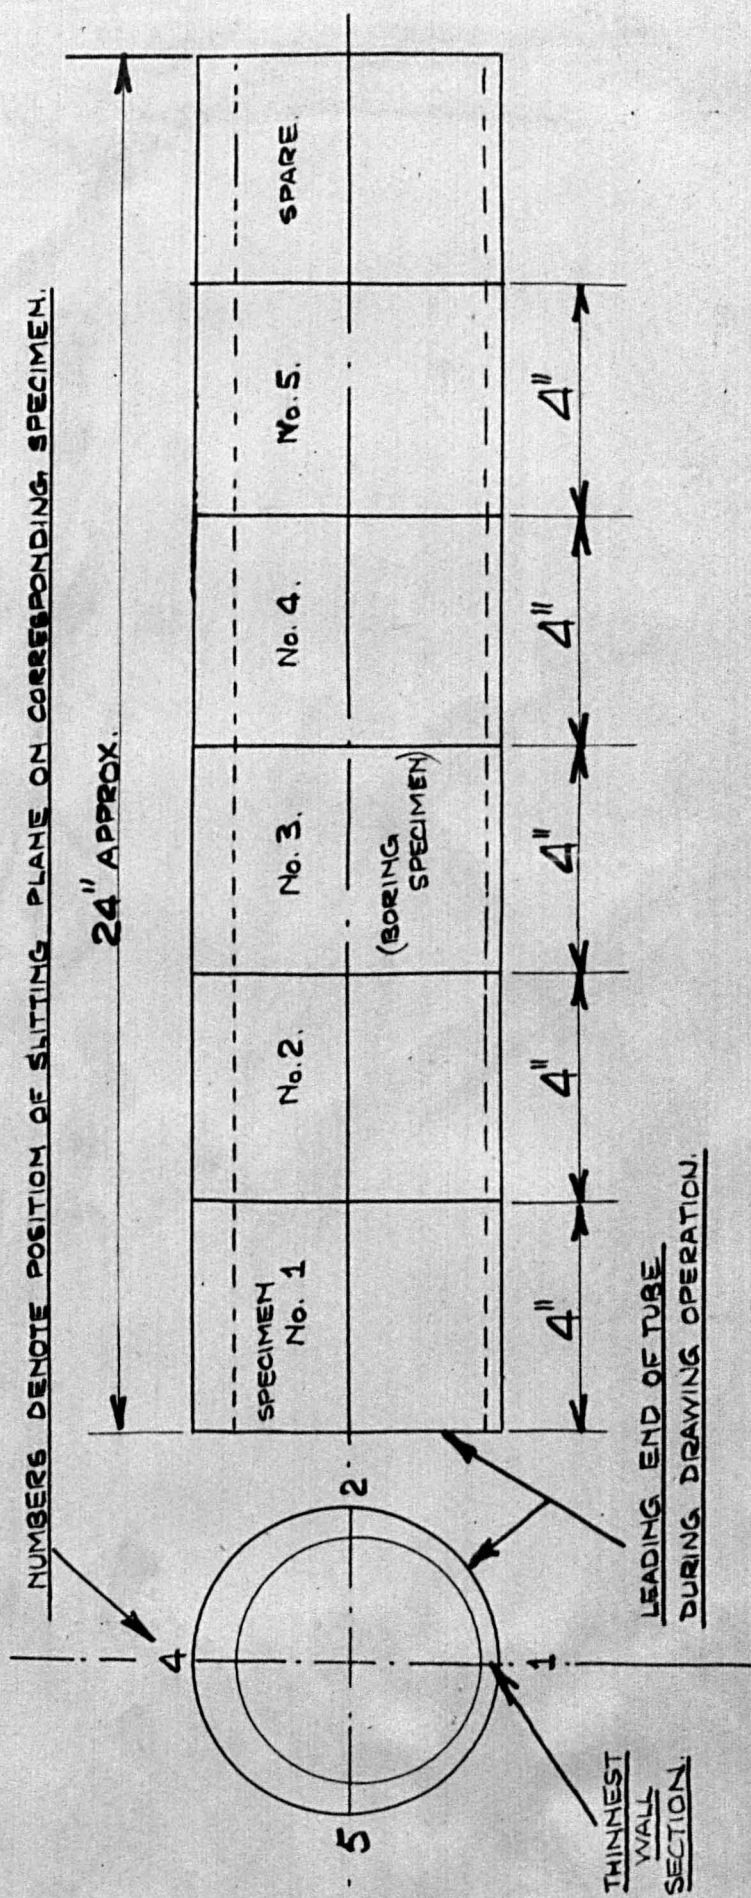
LOCATION OF SPECIMENS AND SLITTING PLANES ON PARENT TUBE.
